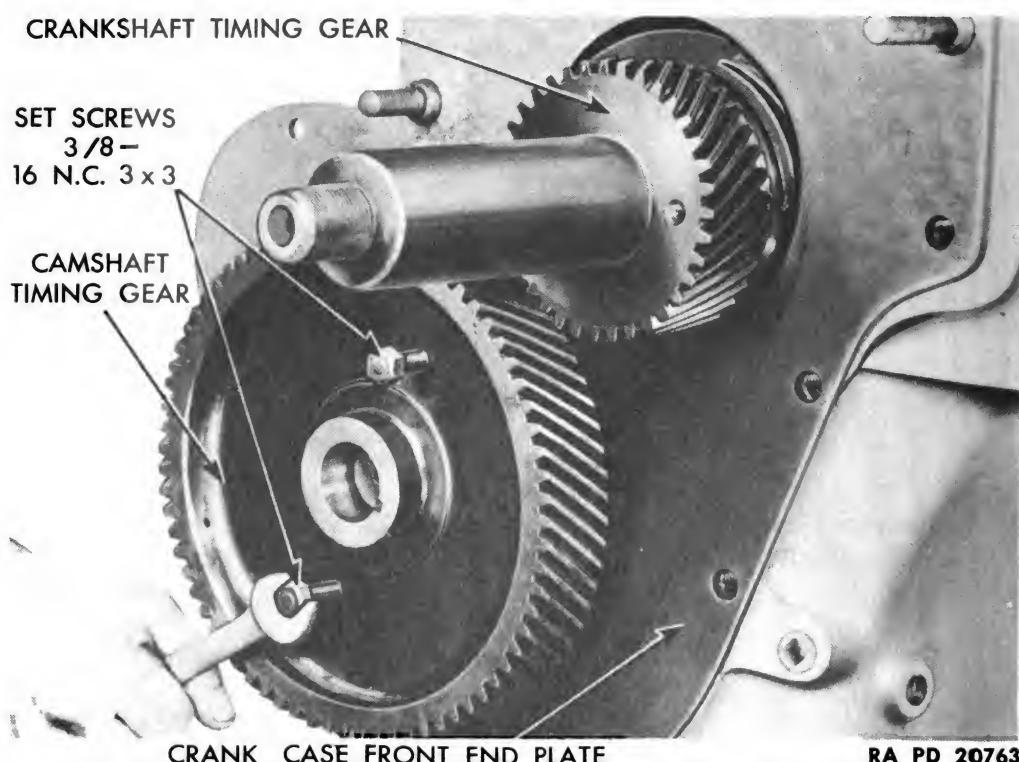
Removing Camshaft Timing Gear, Using Two Set Screws
